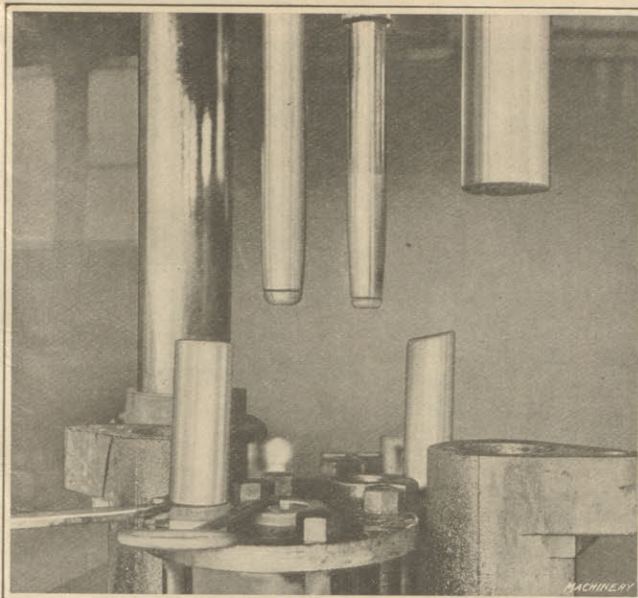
Drawing Shrapnel Forgings in a "Wood" 750-ton Hydraulic Forging Press
